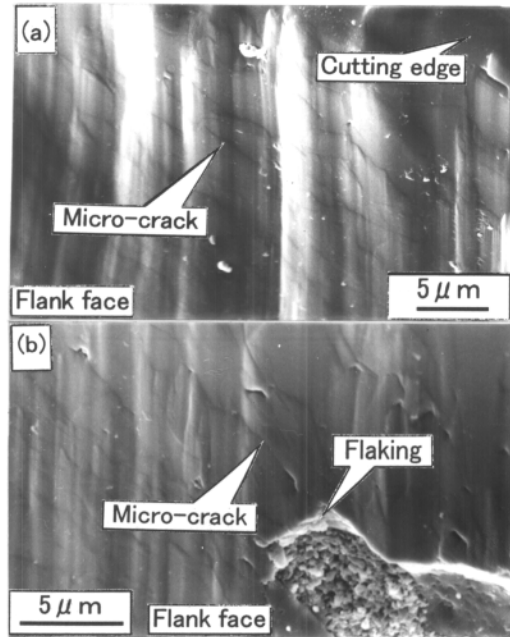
SEM micrographs of typical flank wear part with diamond coated tool; (a) before flaking and (b) after flaking
